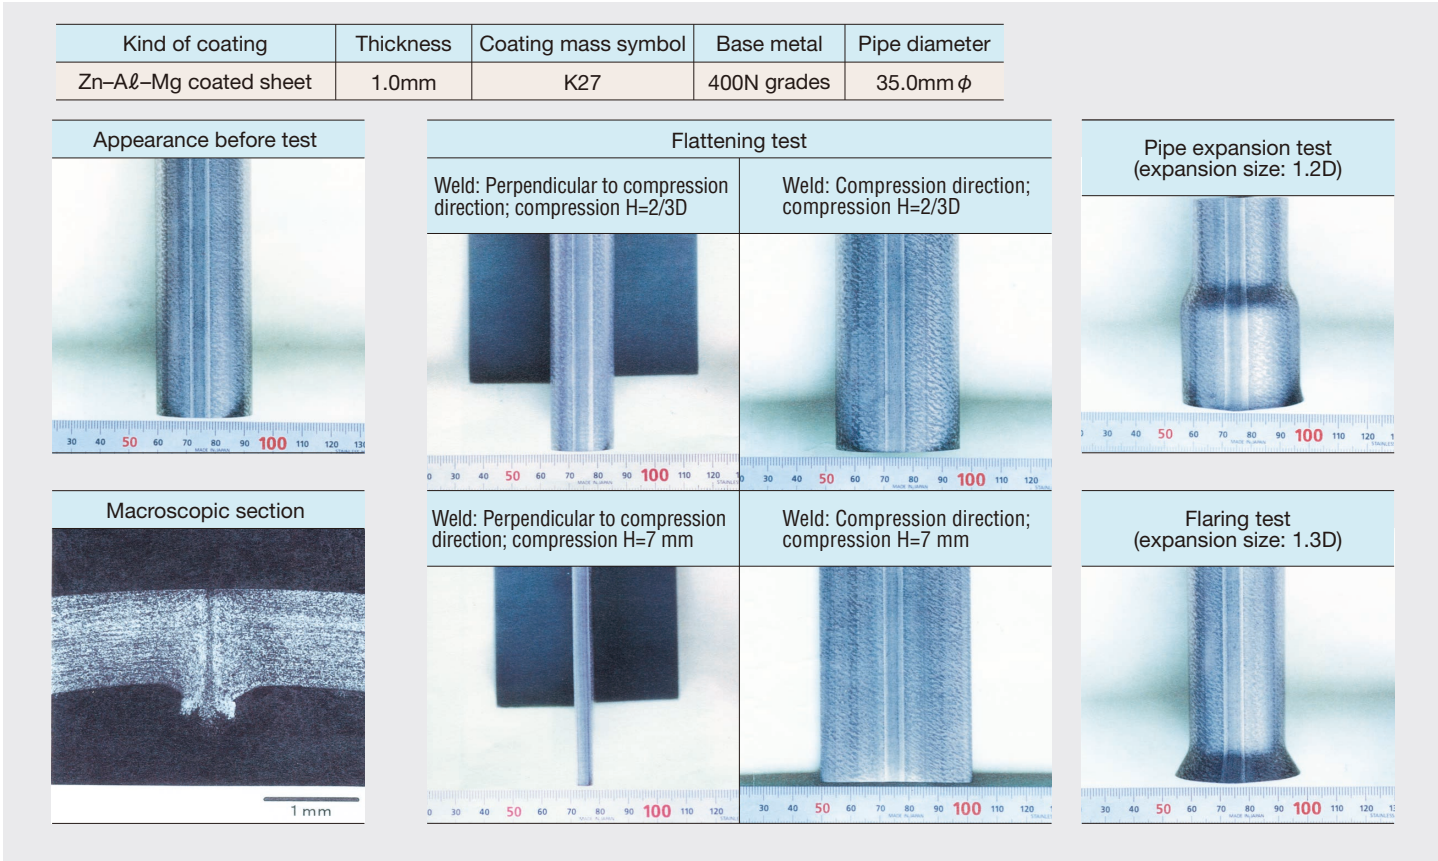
High-frequency Weld Test Results for Coated Sheets (thickness: 1.2 mm)
